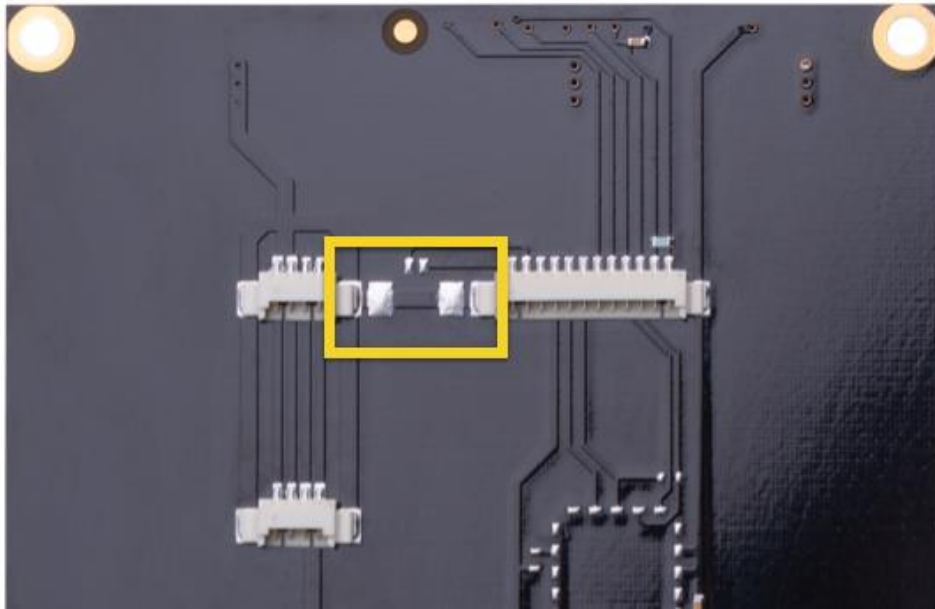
Solar Panel - Bottom Side (location of pads for the external magnetorquer connector)
